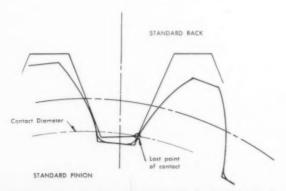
Shown are the contact diameter and the last point of contact for a standard pinion mating with a standard rack. Note that the root of the gear tooth is shown with the maximum radius superimposed upon an unradiused root.
